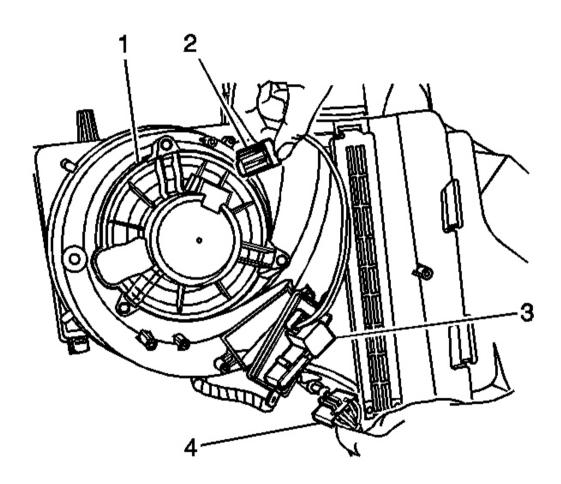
Blower Motor Control Processor & HVAC Module Assembly Courtesy of GENERAL MOTORS CORP.
